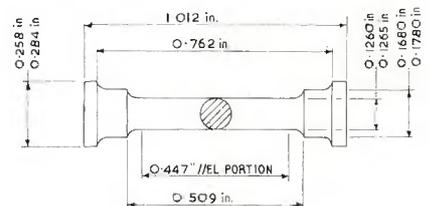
Tensile test specimen (Hounsfield No. 11)
